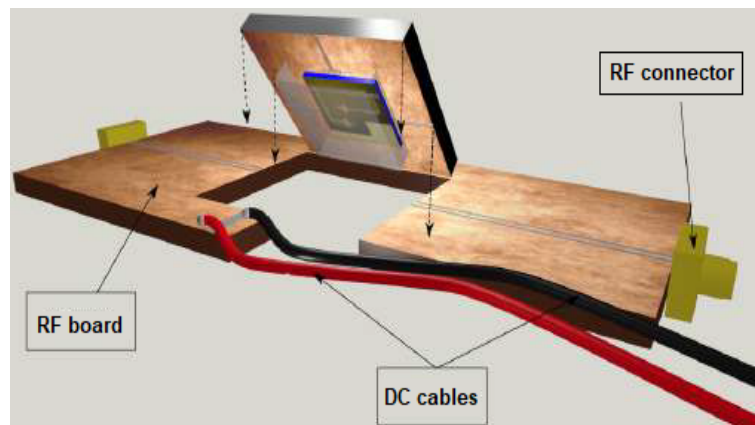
Mounting of the Flip chip package on the board side. Half of the plastic lid and a quarter of the board were cut and removed from the drawing to show the air cavity inside the package and the details of the Flip chip mounting.
